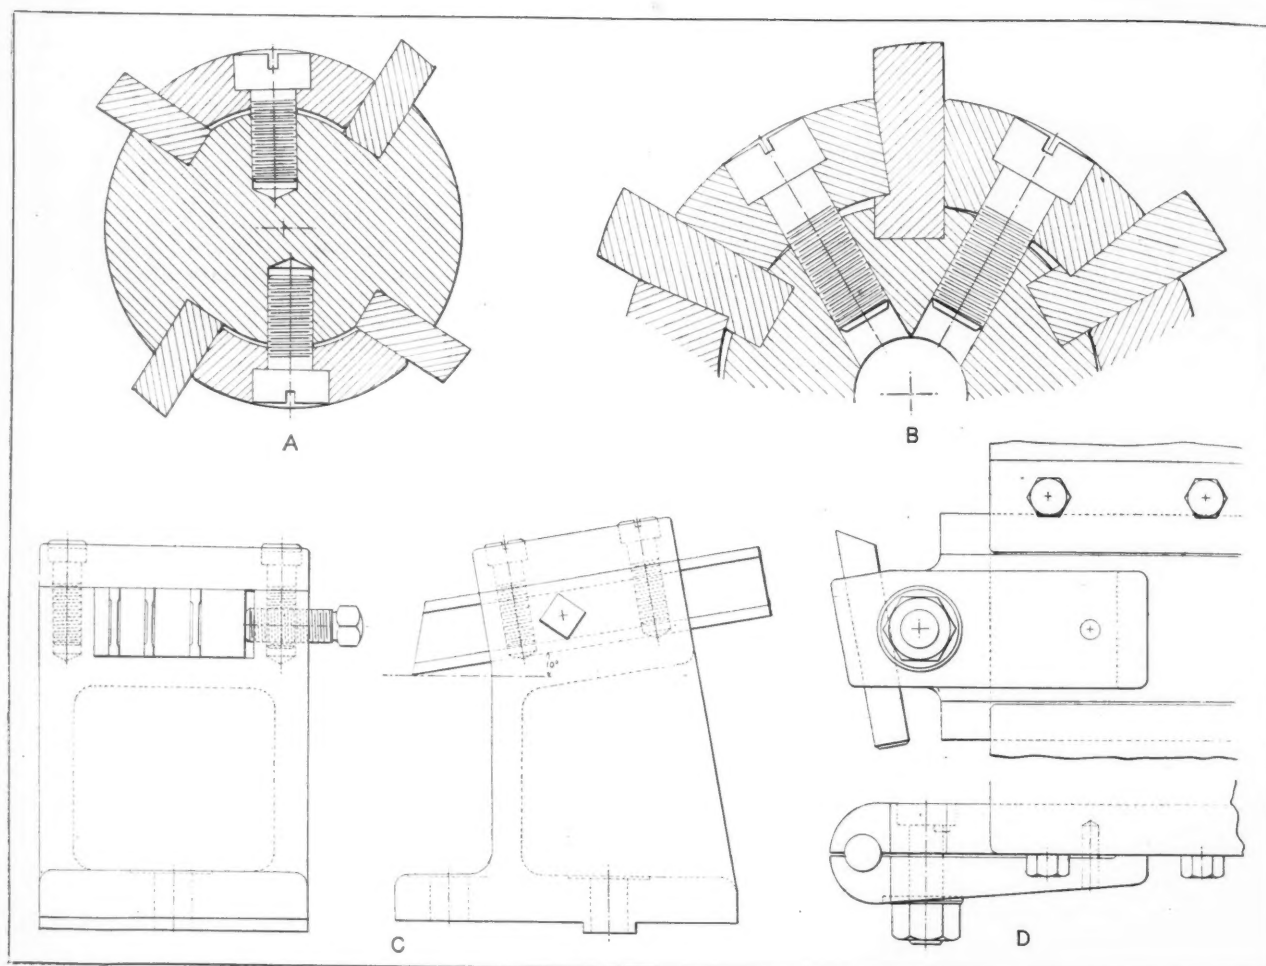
Methods of Holding Cutters in Rotating Heads and in Fixed Tool-blocks
